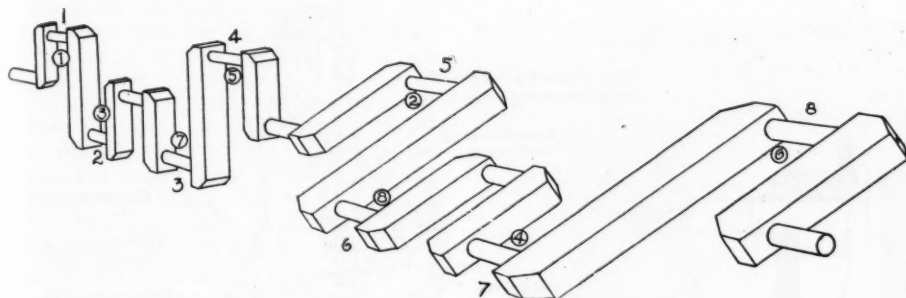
Crankshaft used on Duesenberg eight-cylinder racing engine
